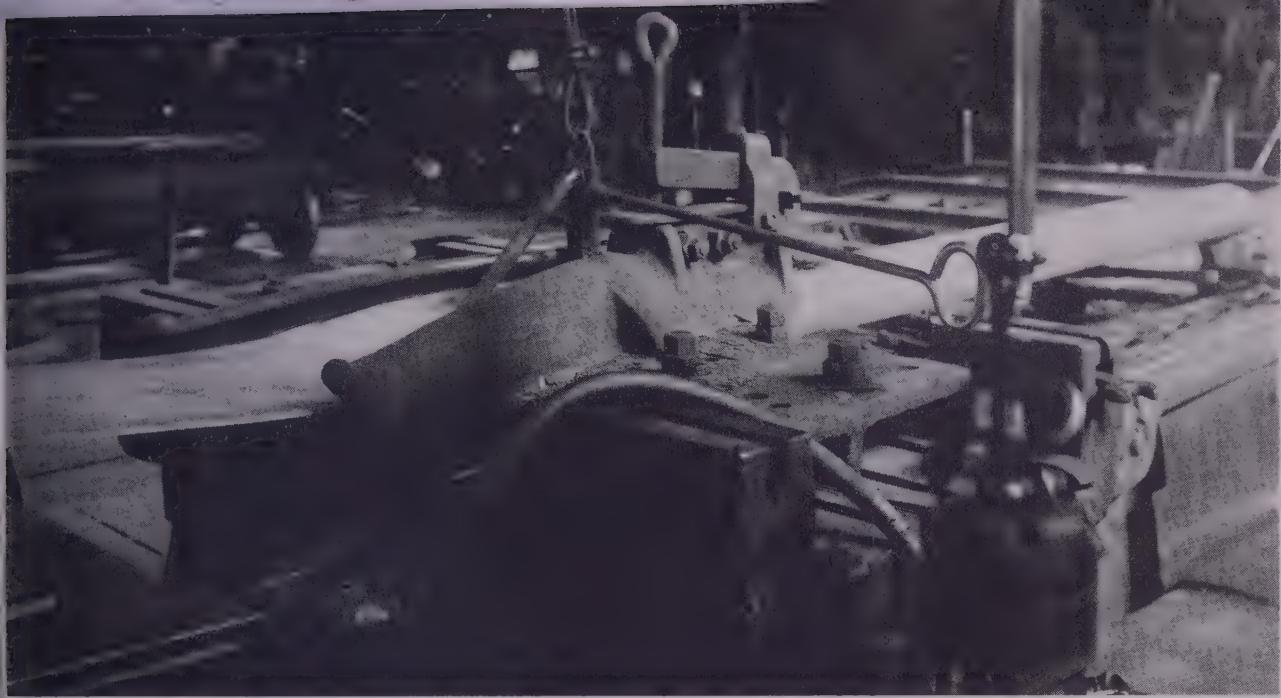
Bending die, showing how skelp is bent into a cylindrical shape
